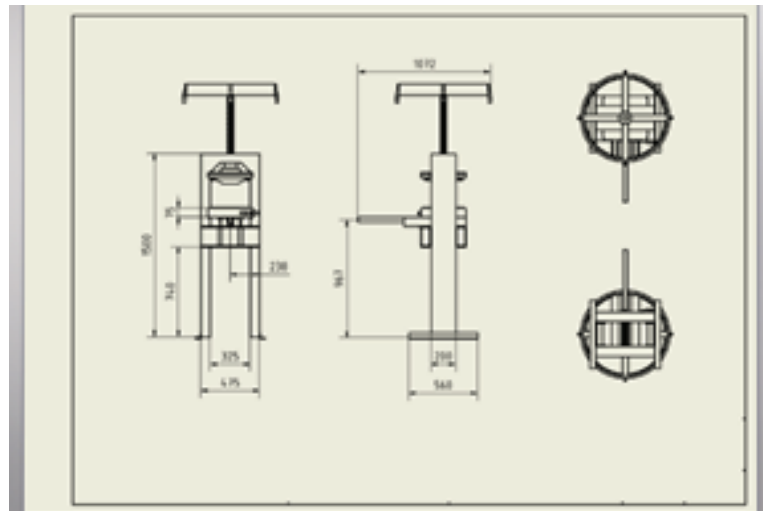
2D Prototype Picture of A Mortar Molding Machine with A Diameter of 30 cm.
